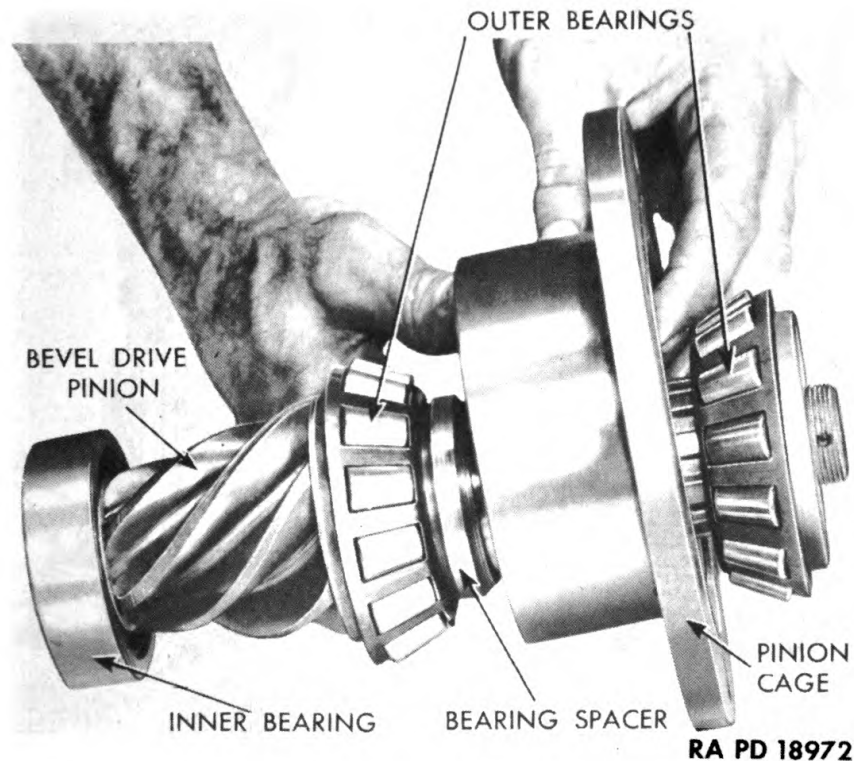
Removing Bevel Drive Pinion and Bearings Assembly
